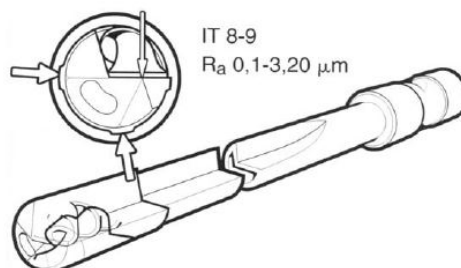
A gun drill for a small diameter deep hole drilling. The chips are transferred outside the tool in a V-shape groove with the cutting oil. (DS, Deep Hole Drilling, 2008)
